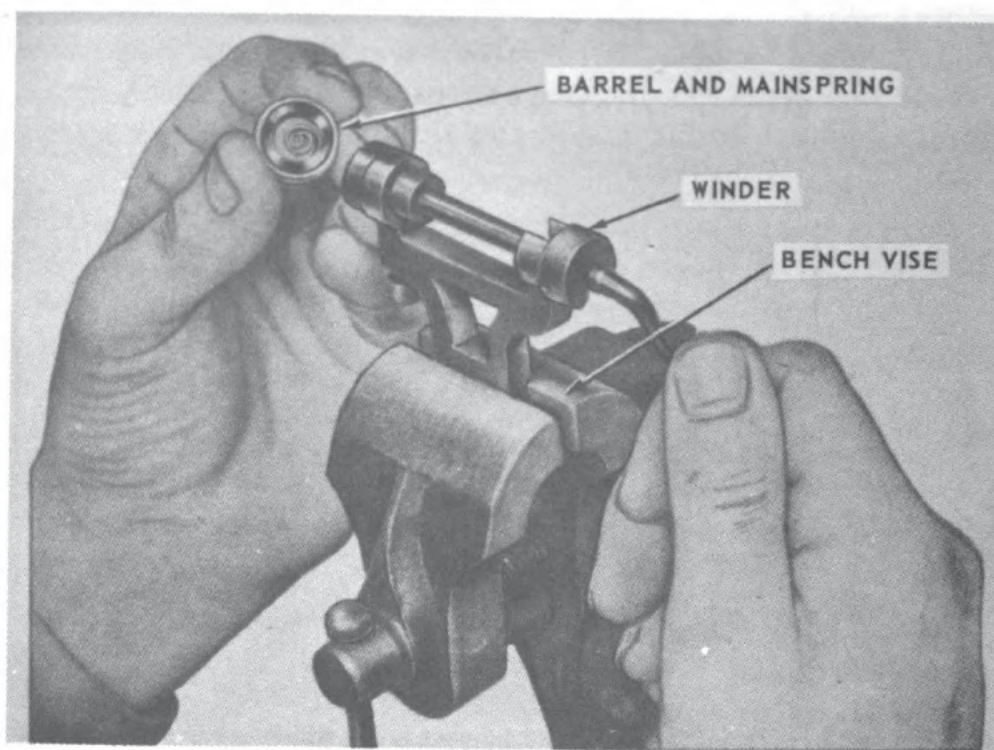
Assembling mainspring into barrel, using mainspring winder.
